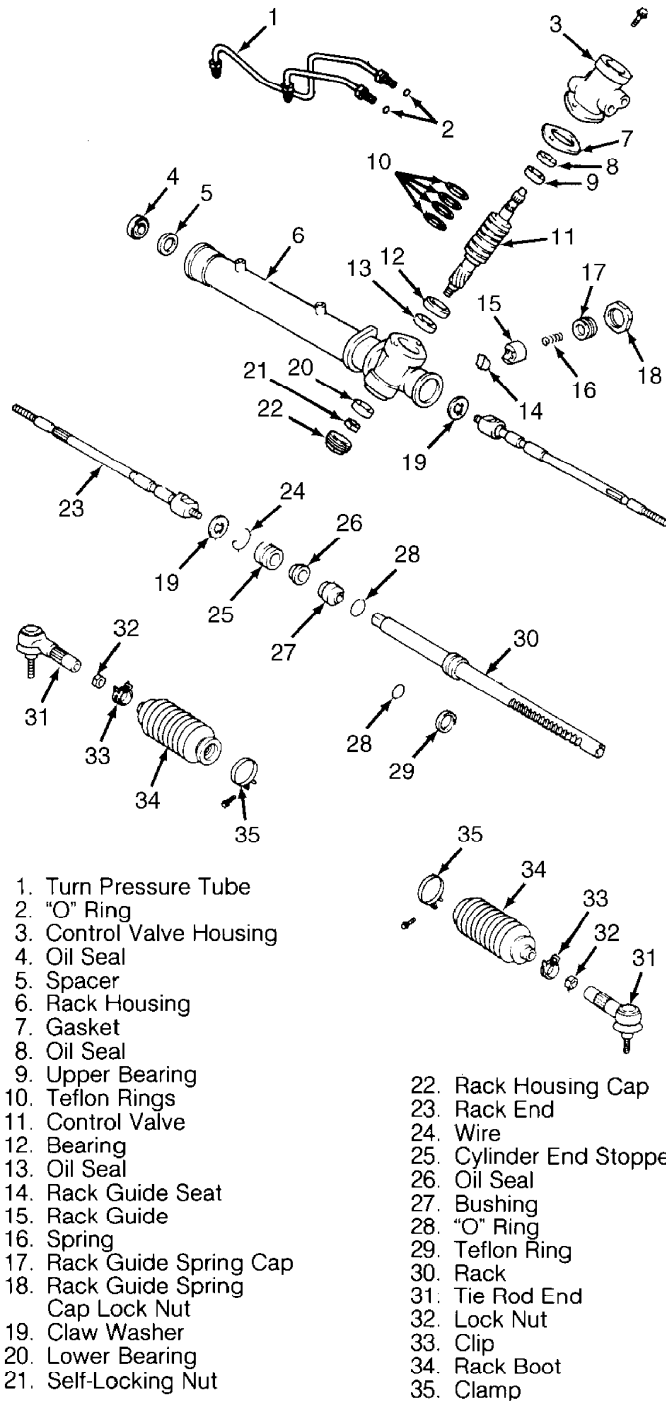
Exploded View Of Power Rack & Pinion Steering Gear (Corolla)
